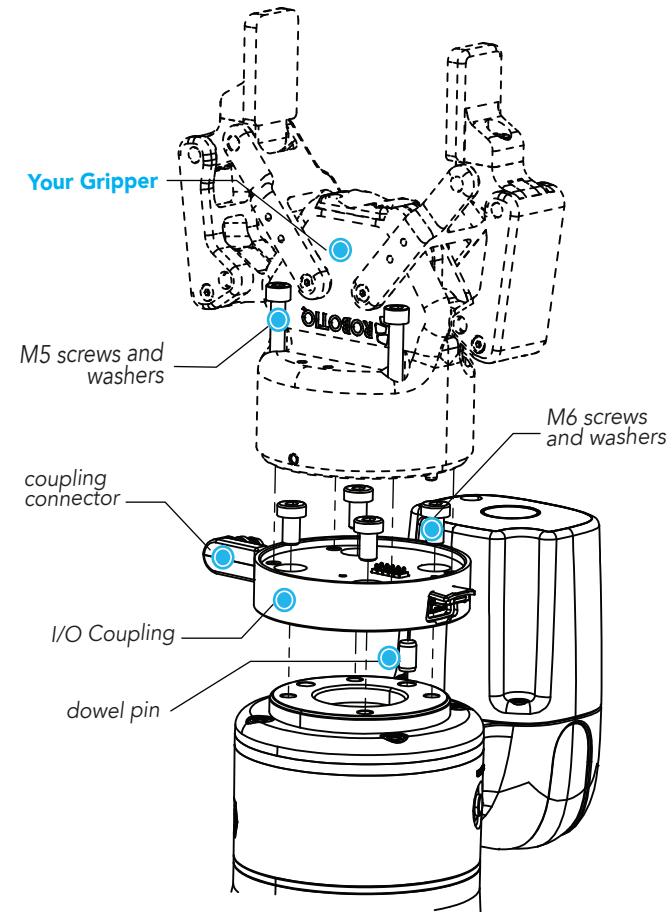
Example of 2-Finger wrist connection kit exploded view, on robot arm.
